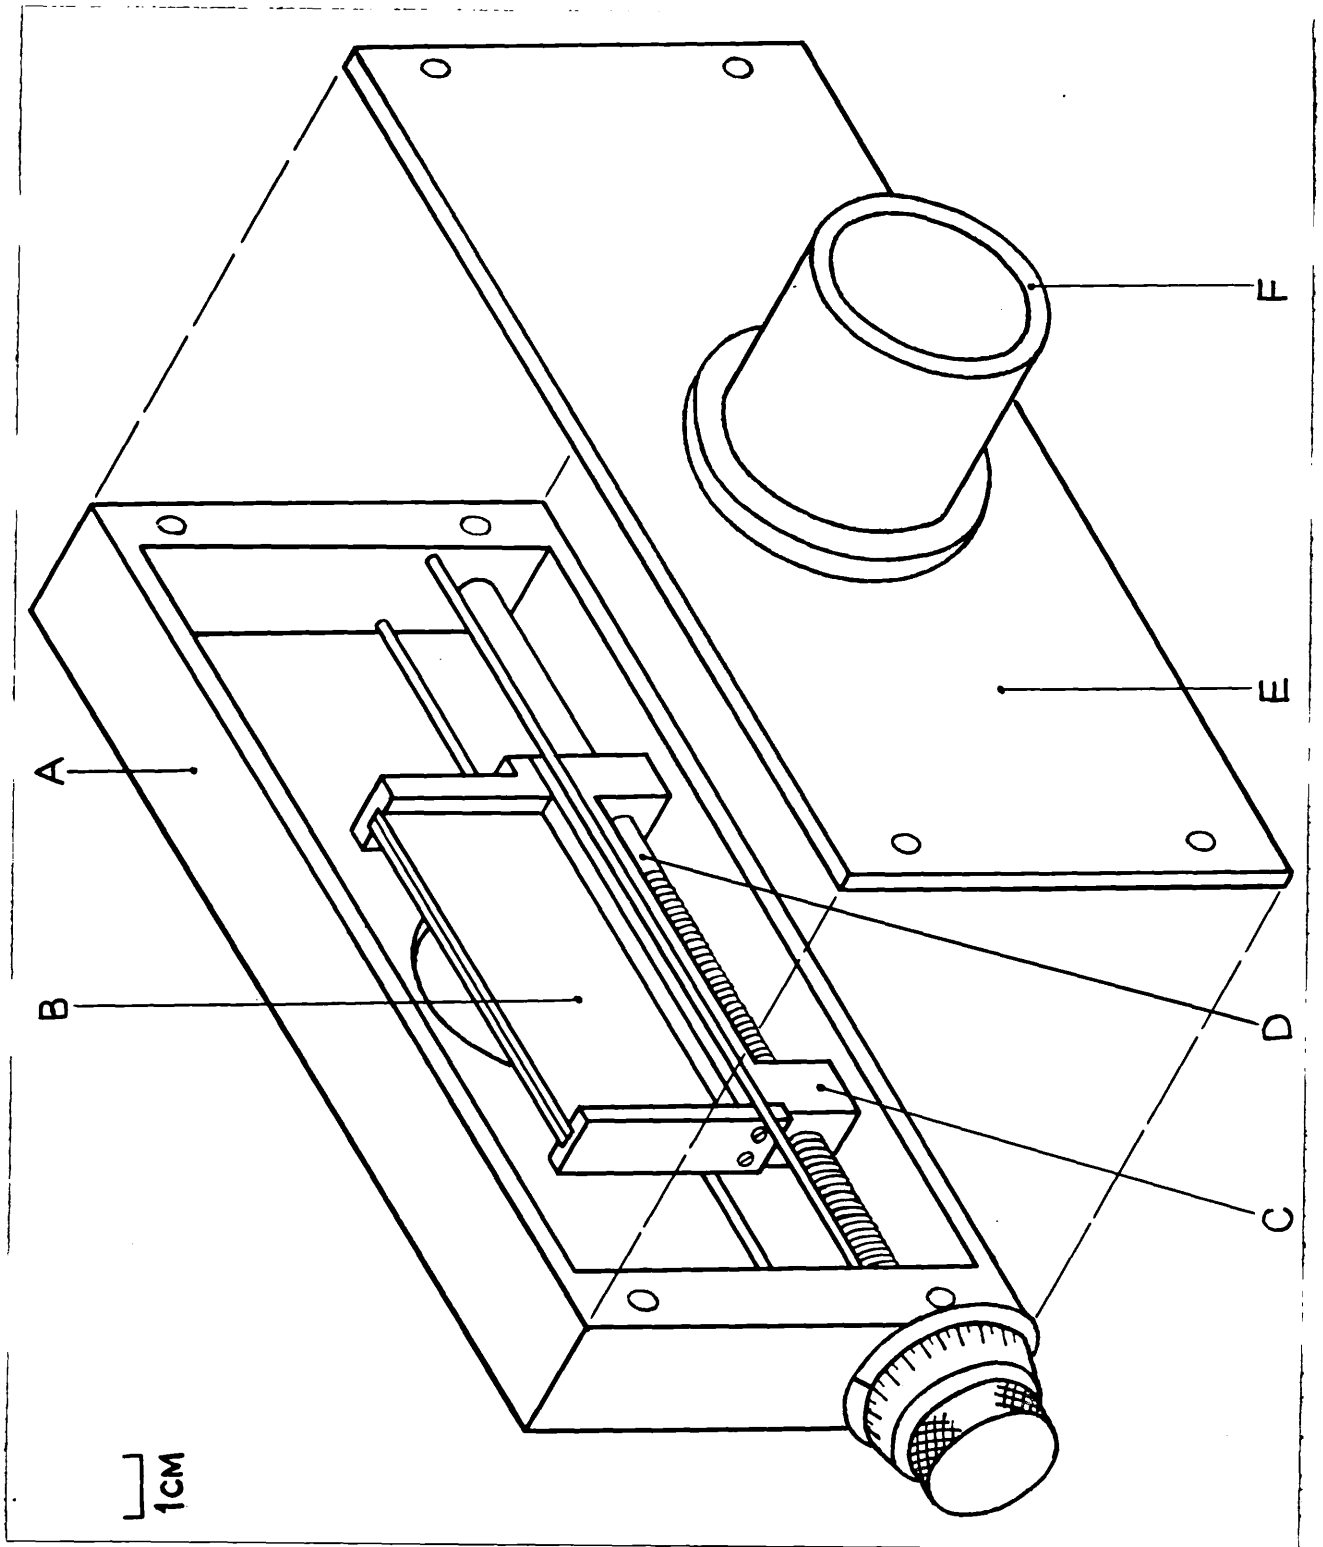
Isometric drawing of graded wavelength filter attachment.
